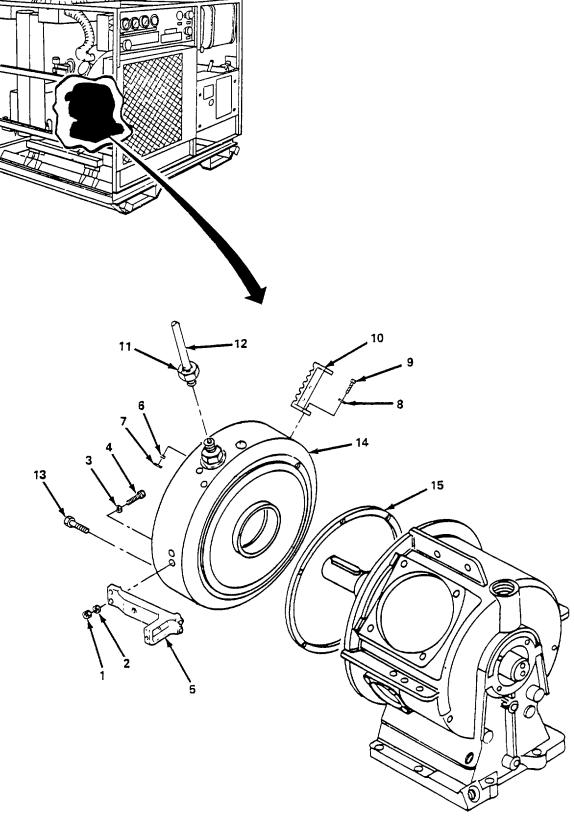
Crankcase Front Cover Assembly, Replace.
